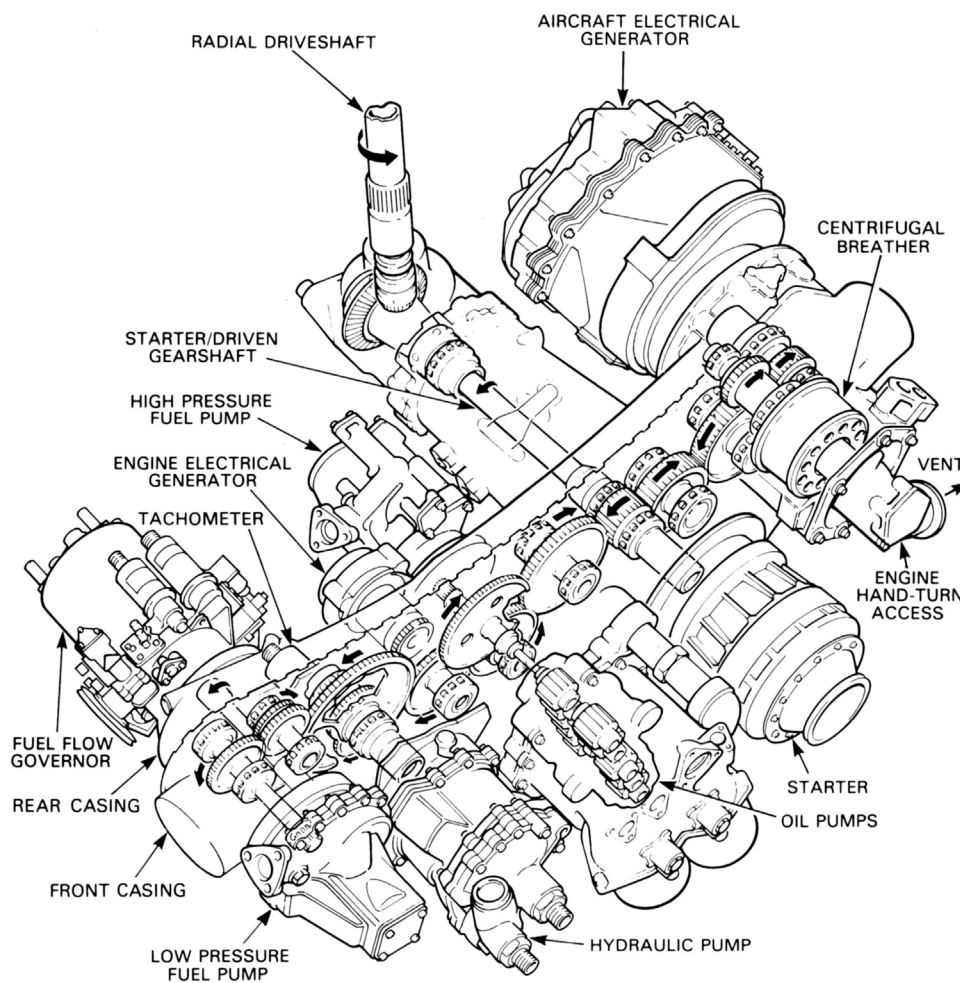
An external gearbox and accessory units. (Source: Rolls Royce.)
